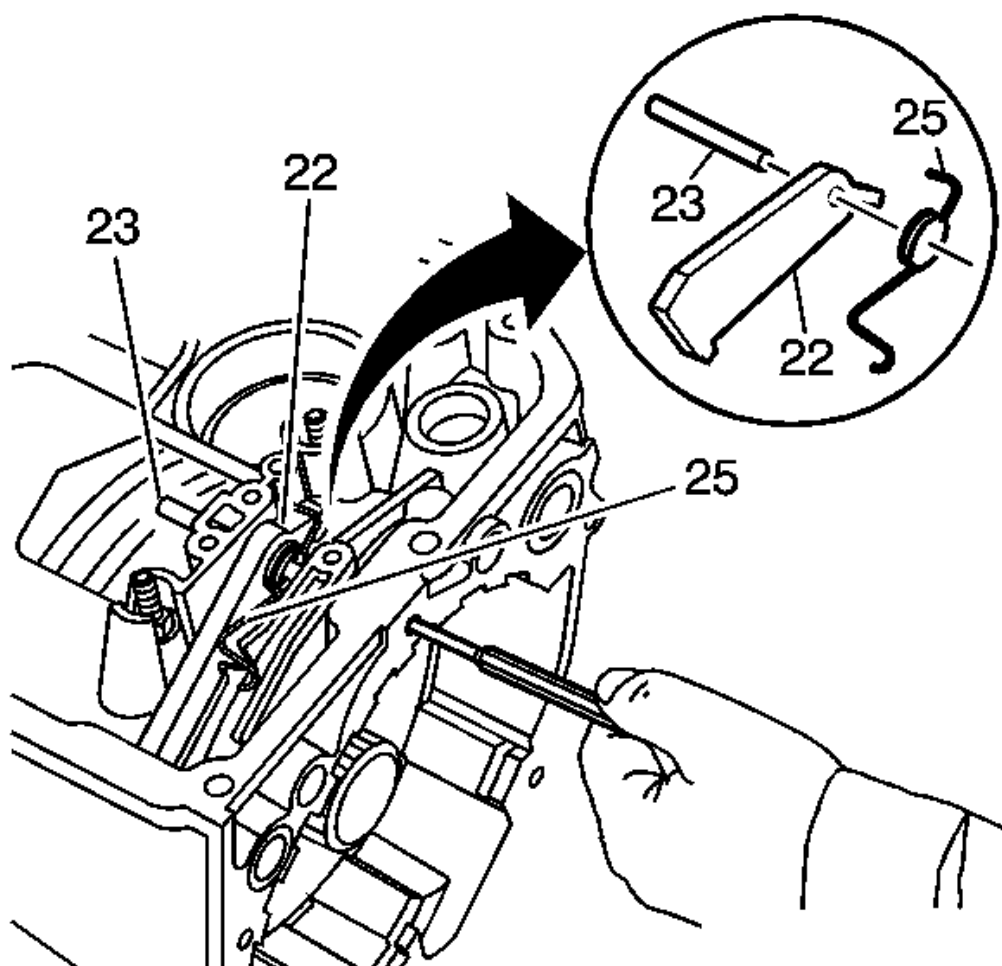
Expanded View Of Parking Pawl, Spring & Pivot Pin
